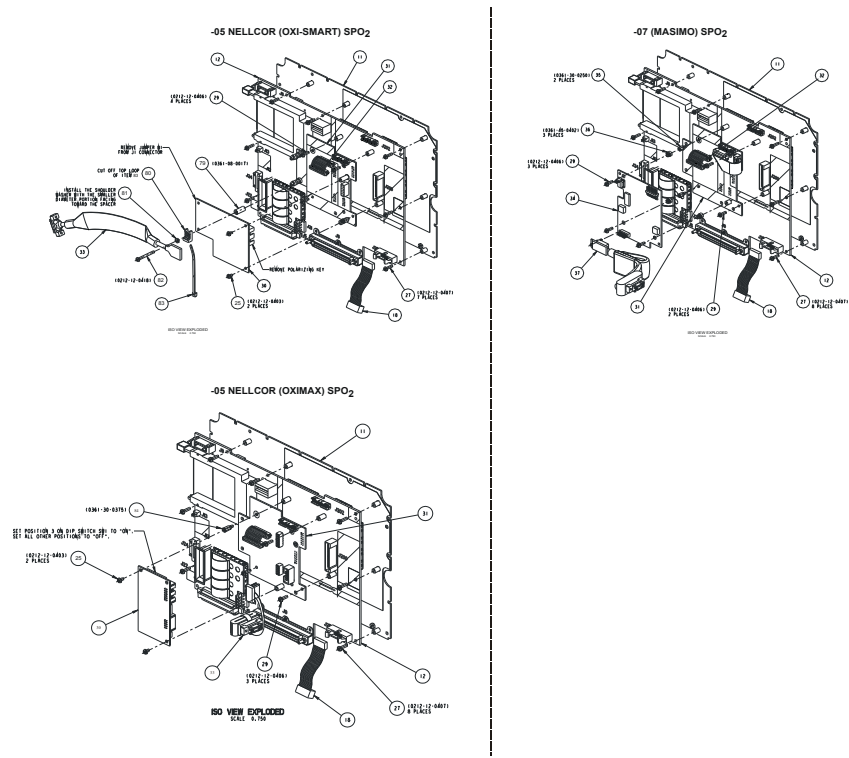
Main/Rear Assembly (P/N 0998-00-0900-XXXX)
